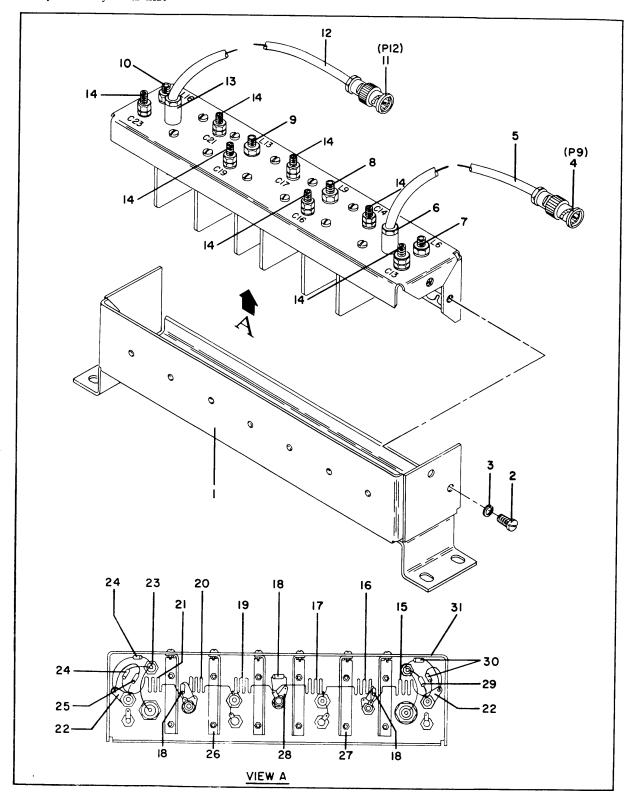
180 Mc Low Pass Filter Assembly, Exploded View
